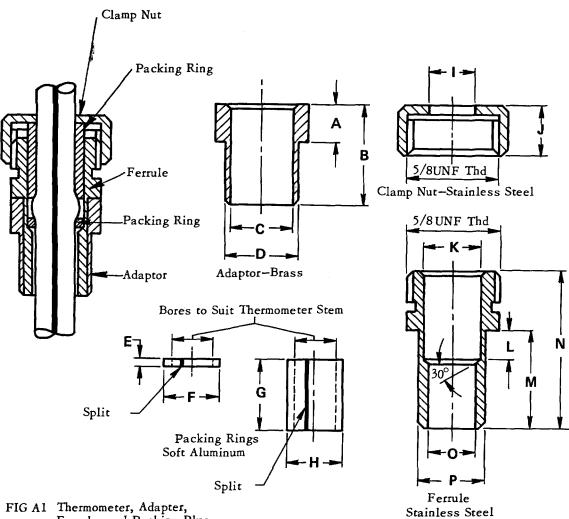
FIG Al Thermometer, Adapter, Ferrule, and Packing Plug
